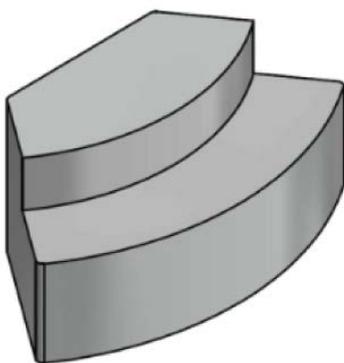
Machined slot for canister in a type II₁ block to get a type II₂ block.
